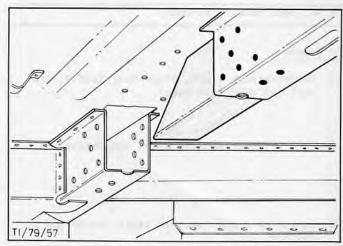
Drill holes in remaining section of side member and locate new section of side member.
